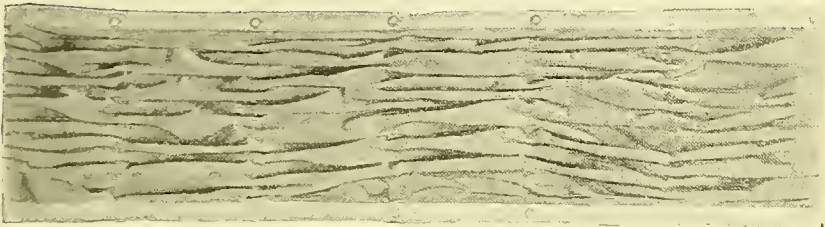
Side View of Diaphragm, between Outer and Inner Face-plates.
